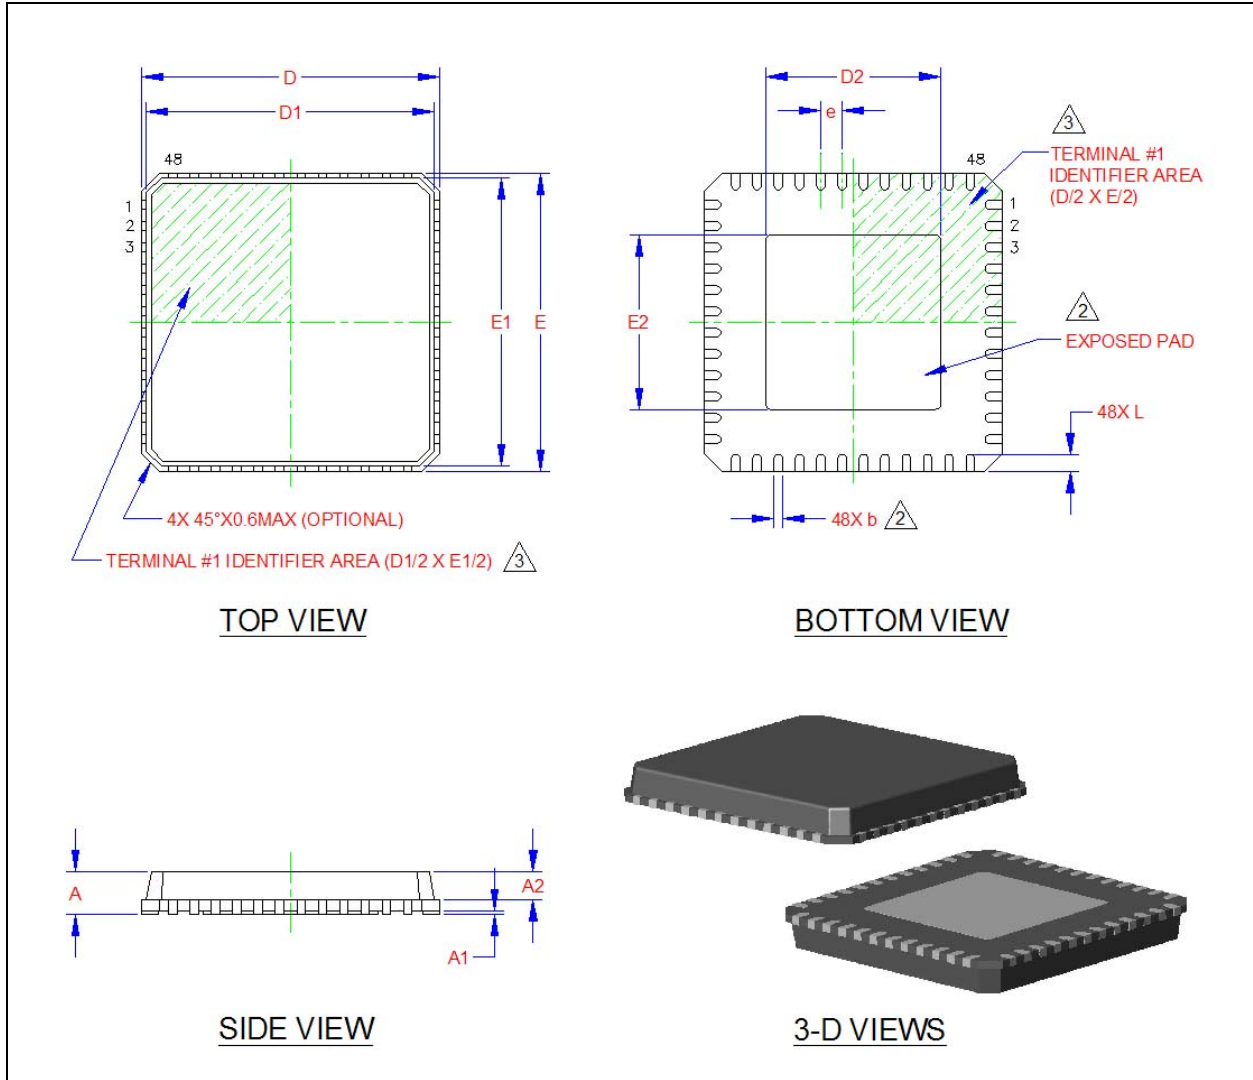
48-Pin QFN 7mm x 7mm Package Drawing
